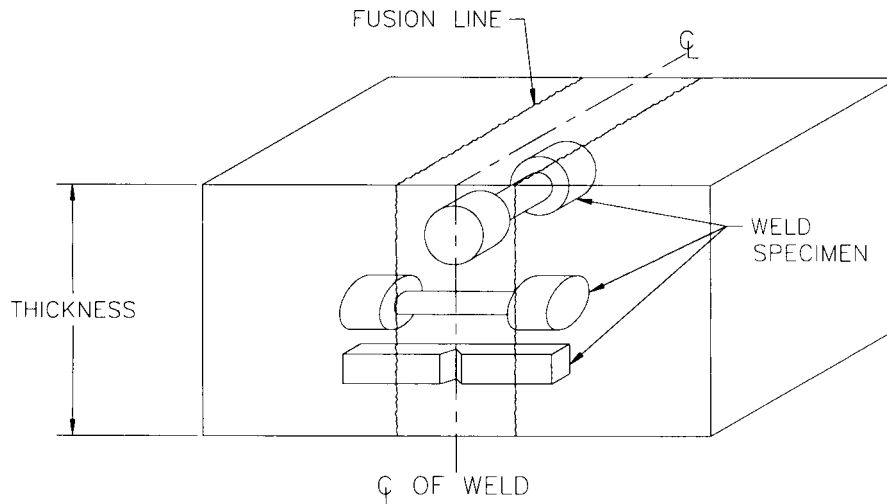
Location of Test Specimens Within Weld Test Material
